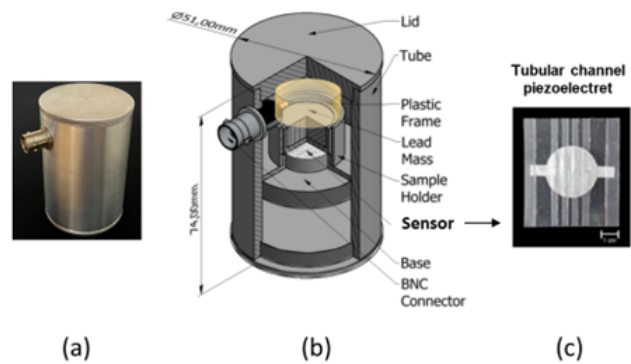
(a) Photo of the TFPA prototype. (b) Exploded view of the TFPA internal structure. (c) Piezoelectret sensor, prepared with open tubular channels.
